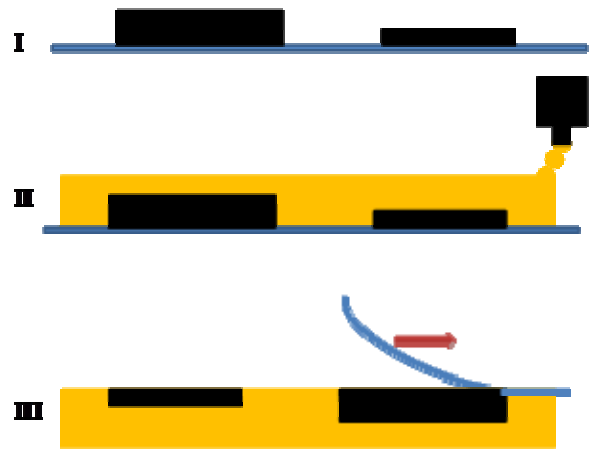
Molding process. I: component assembly. II: encapsulation. III: adhesive tape removal
